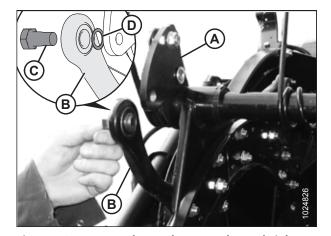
Bar Crank Attachment Holes and Link Alignment
